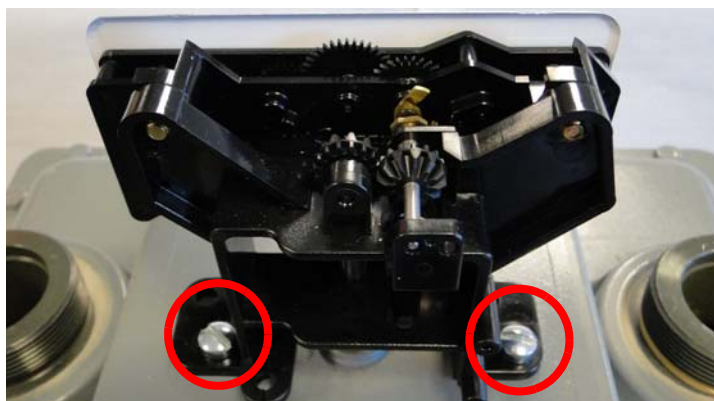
5. Rear View of Supported Index Mounting Bracket Assembly
